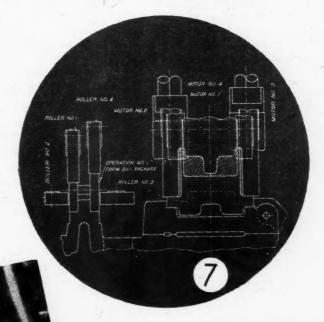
Sketch for typical spar mill setup. The cross sectioned part is the material removed during operation No. 1.
